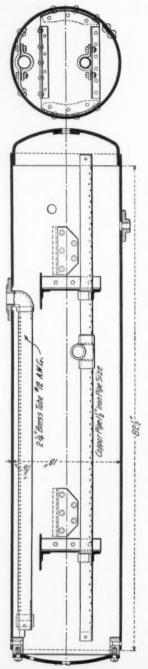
HEATER FOR COMPRESSED AIR MOTOR CAR-THE LATEST DESIGN.
